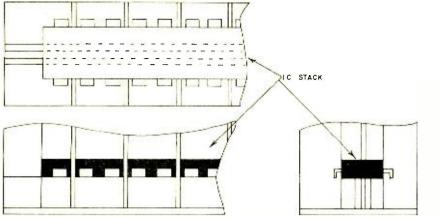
A JIG IS USED to hold the IC's in perfect alignment so they can be glued. It is constructed from thin metal strips.
